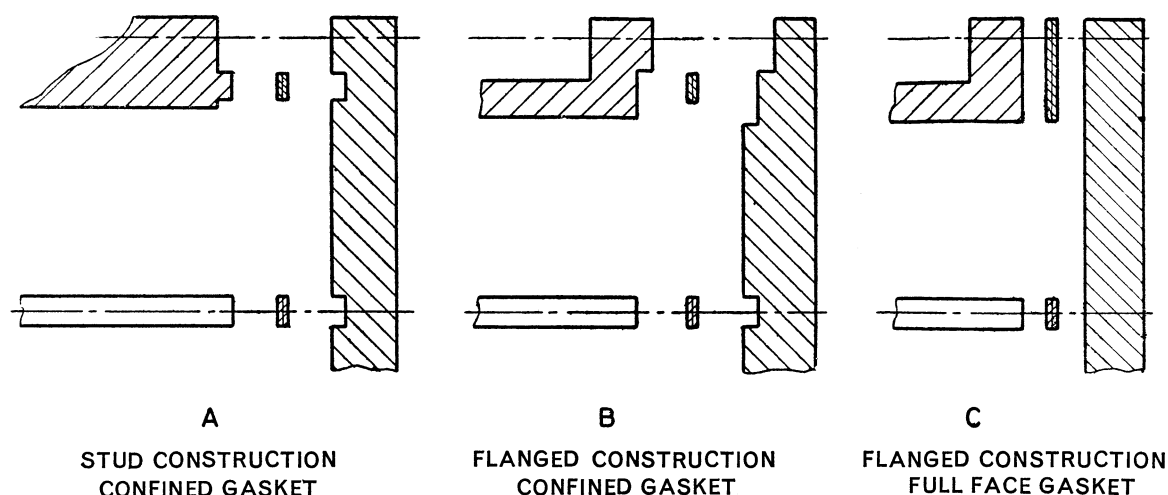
TYPICAL CONFINED AND FULL-FACE GASKET JOINT DETAILS
